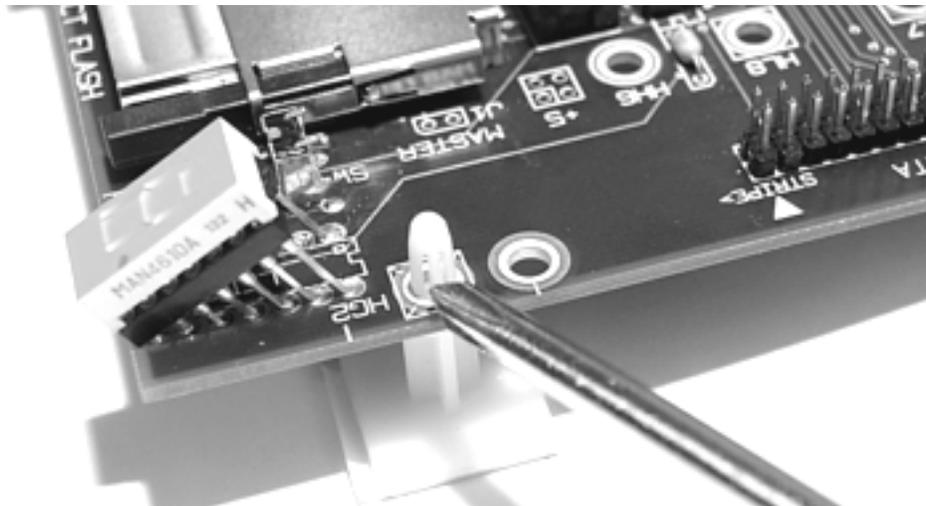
Pressing the nylon mounting post locking clip to remove the post
